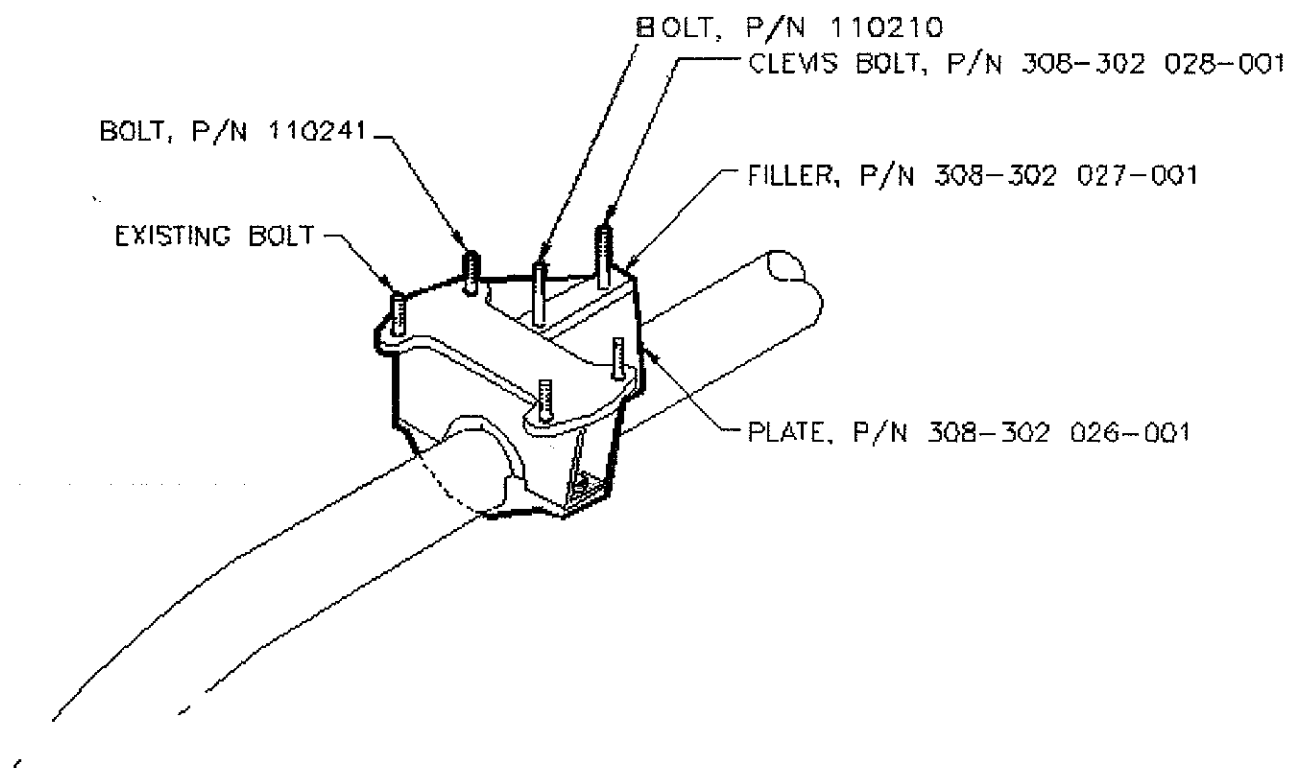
(Sheet 2 of 2), Forward Aircraft Attachment Fitting Installation (Aeronautical Accessories Gear)
